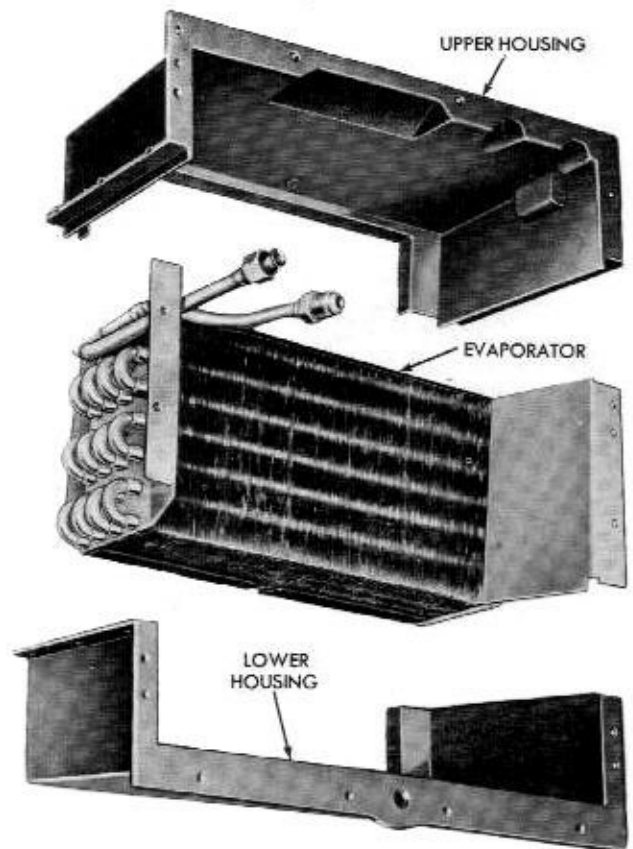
Evaporator Cover and Housing Disassembled—(61L-8803)
